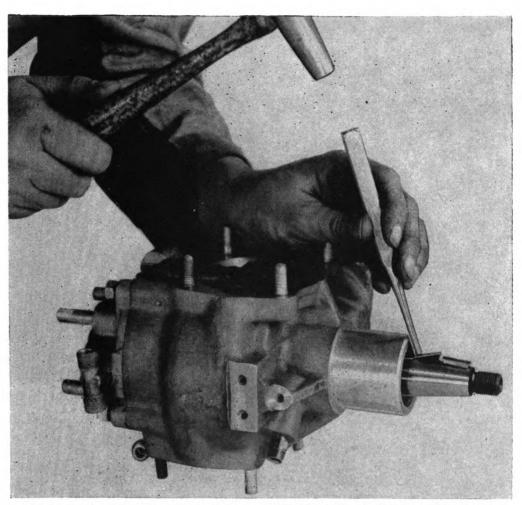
Removing flywheel keys with small flat-end punch and hammer.
